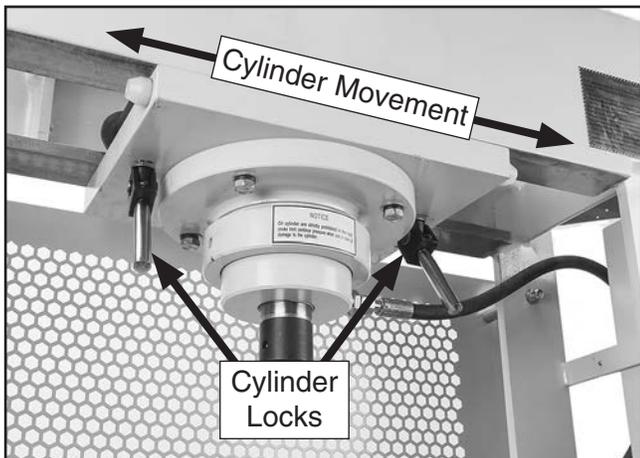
Ram cylinder positioned horizontally above off-center workpiece.
